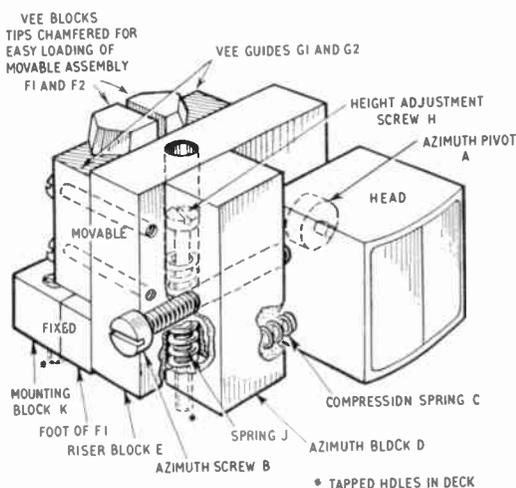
The adjustable mounting for professional grade magnetic recording heads.
